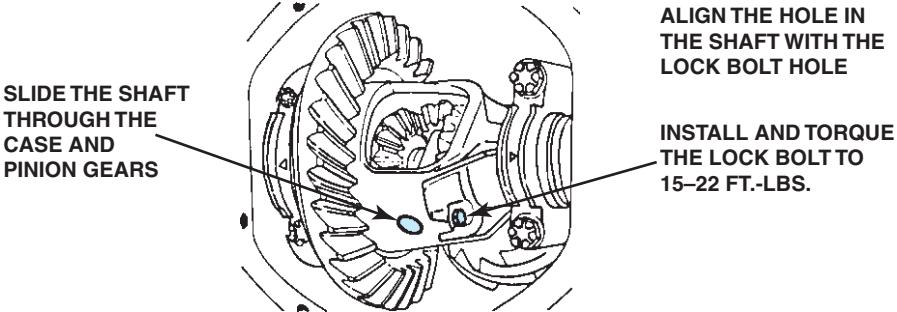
Installation of the differential pinion shaft locks the axle and C-lock in place. Be sure to tighten the lock pin to the correct torque. (Courtesy of Ford Motor Company)
